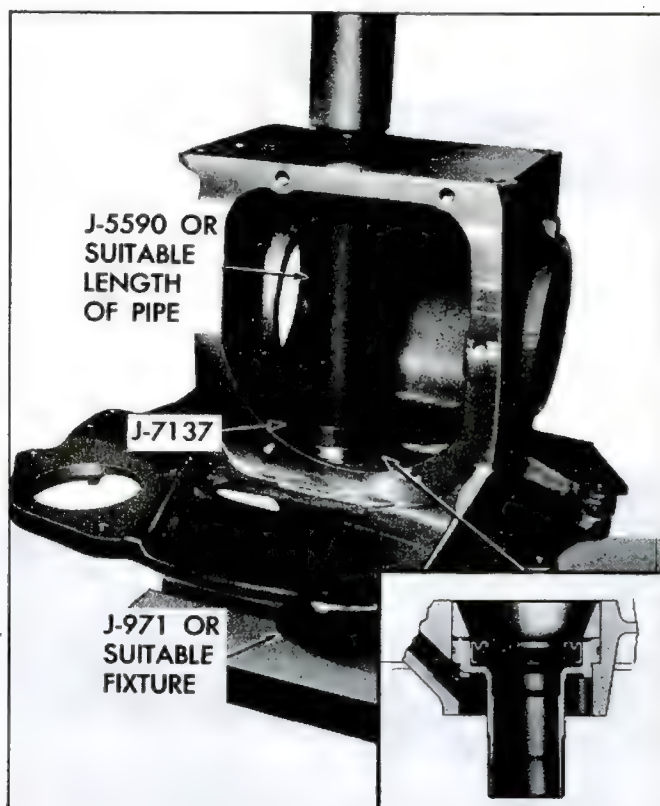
Installing Stator Shaft and Pinion Rear Bearing Race
